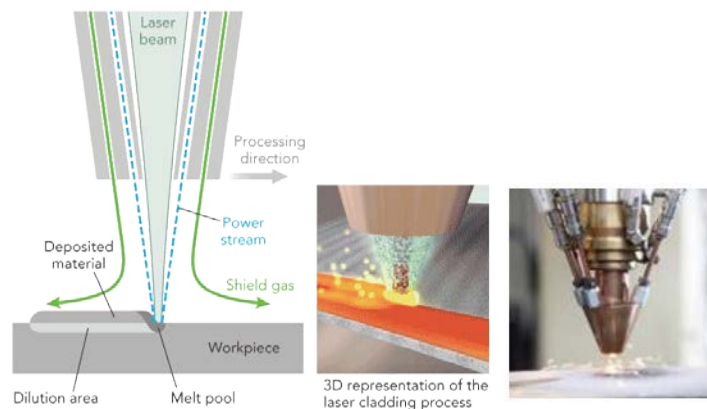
Schematic view of the Laser Metal Deposition process.
